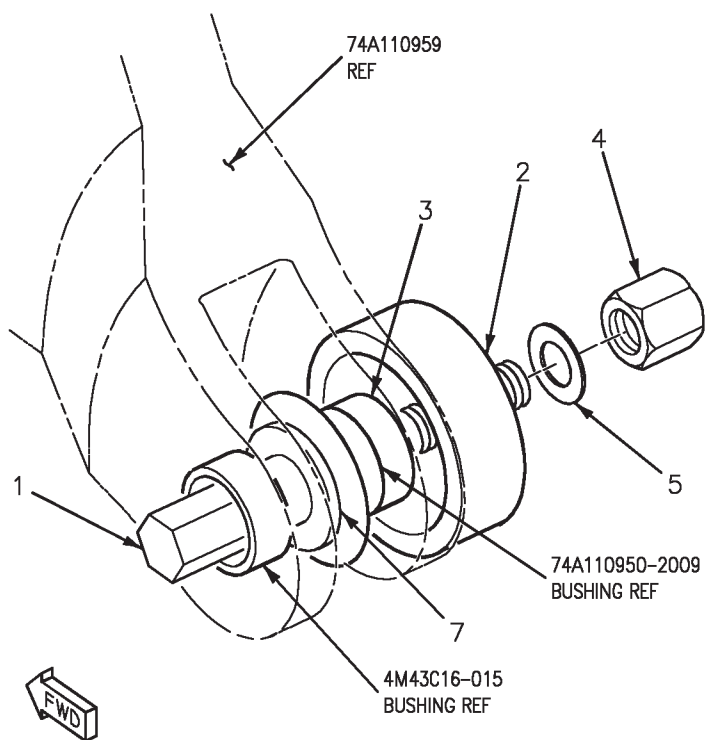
Bushing Removal, Installation, and Reaming (Sheet 5)
